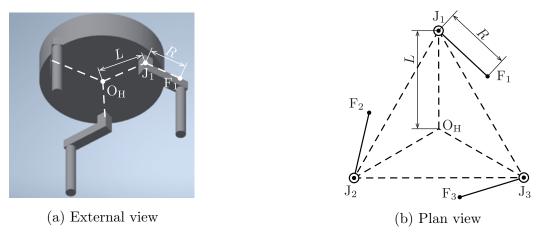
Hand parameters of the chuck-type robotic hand with three rotational parallel stick fingers
